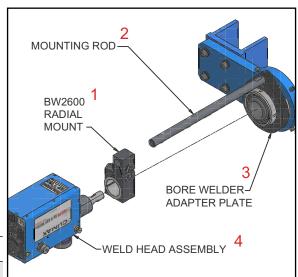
BW2600 ASSEMBLY COMPONENTS
